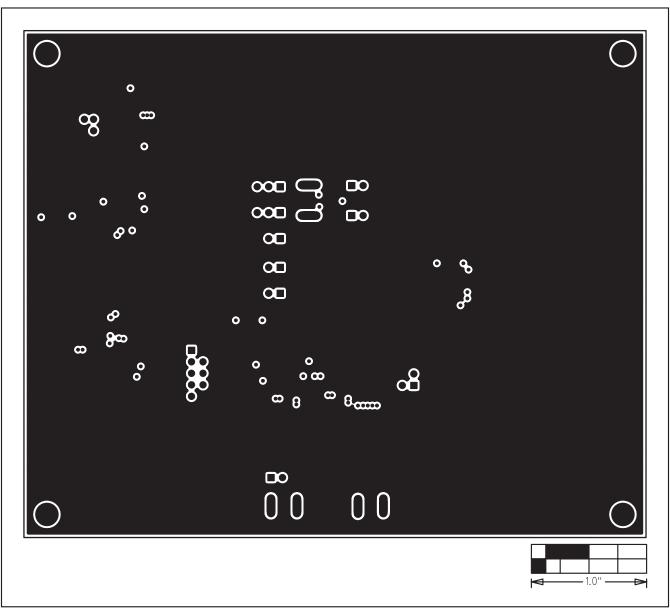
MAX9132 EV Kit PCB Layout—Inner Layer 2
